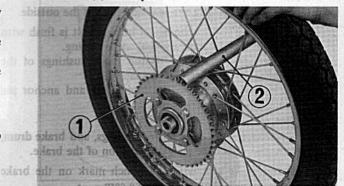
(1) Final driven sprocket (2) Wood block
